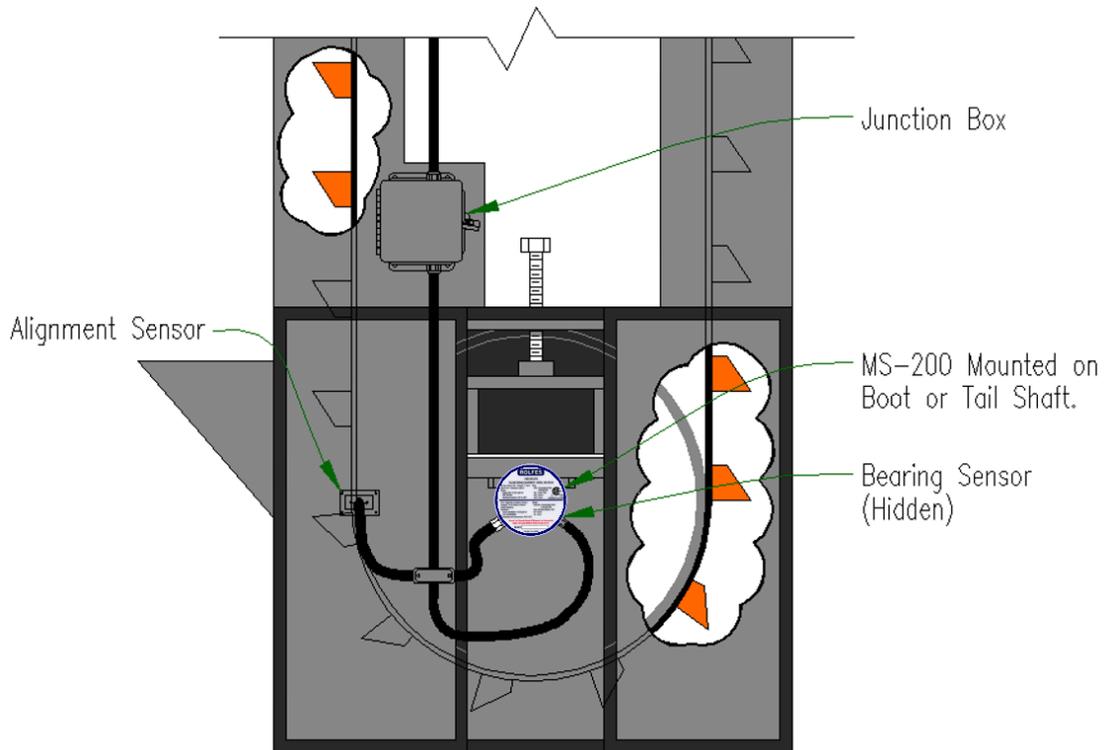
MS-200-60 Mounted to Boot or Tail shaft.
